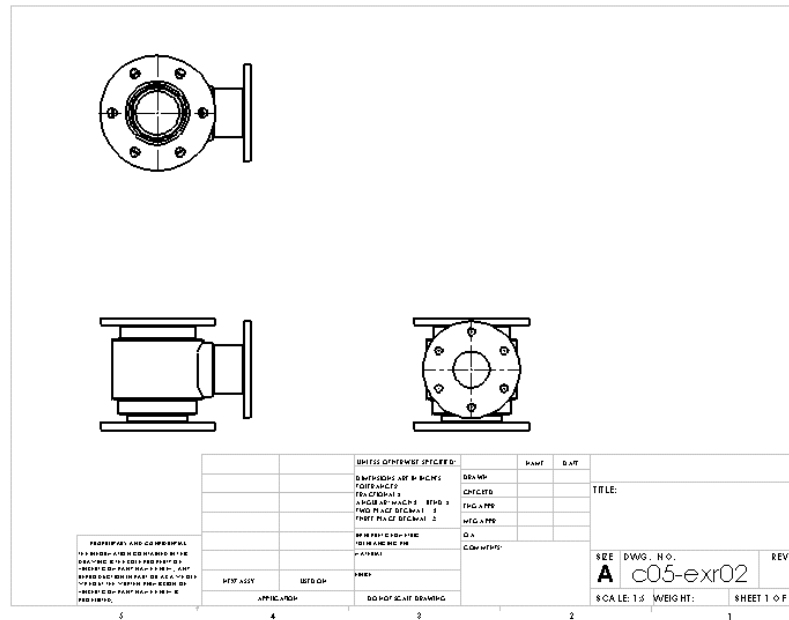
Three standard views generated using the Standard 3 View tool
